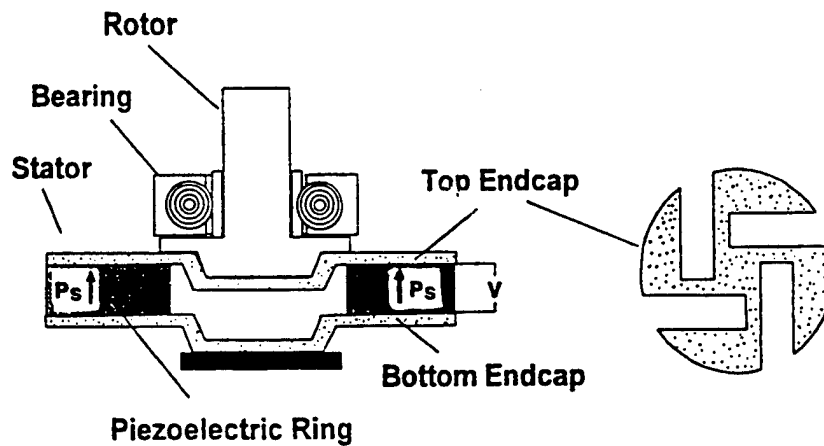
"Windmill" motor with a disk-shaped torsional coupler.
